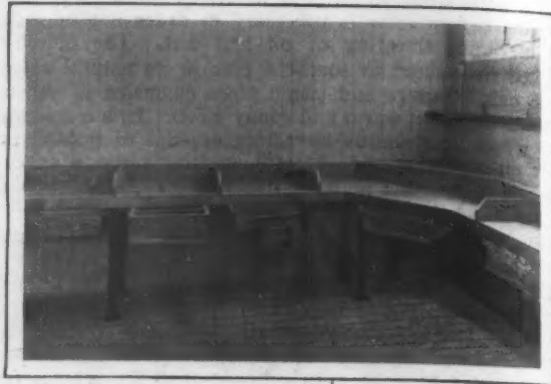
A Corner of the New Inspection Department, Showing Bench Construction
